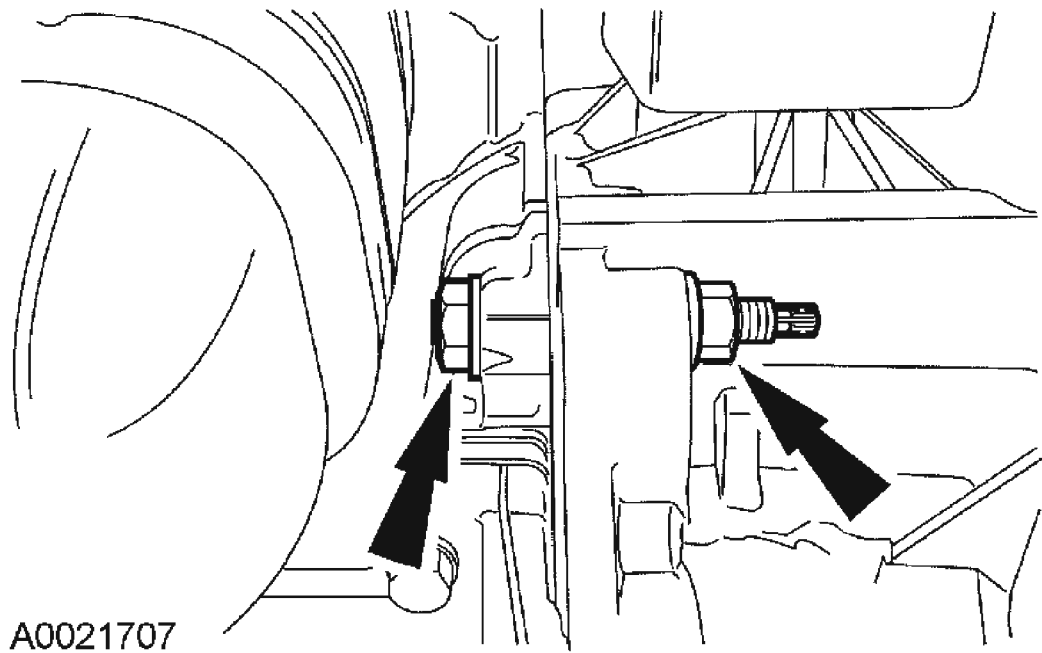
Locating Transmission Fluid Cooler Tube
